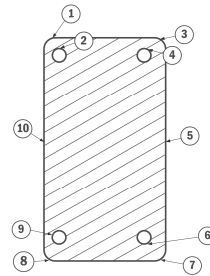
2D dimension measurement point of door hinge with 2mm offset from bottom surface
